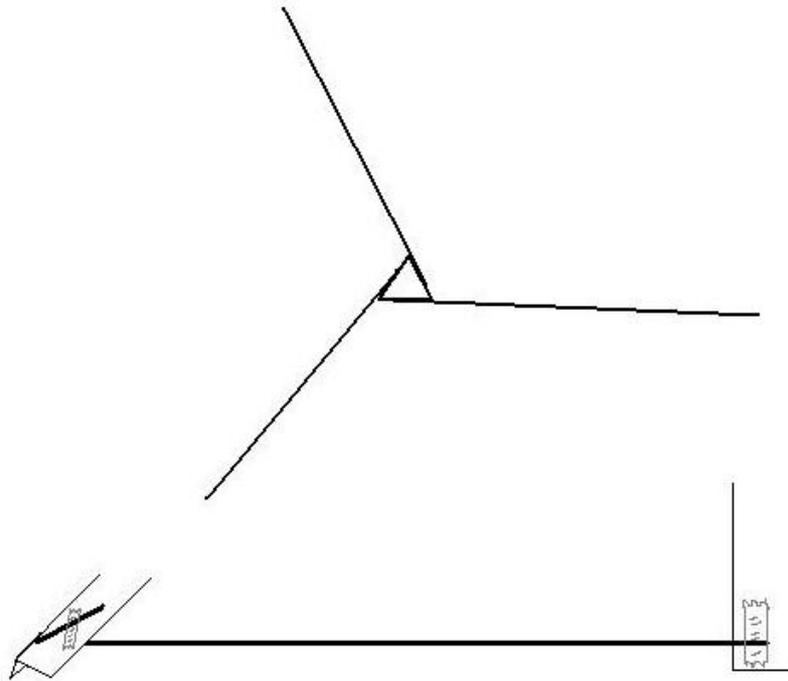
Connecting the center support pieces (3 mm) from leg to center.
